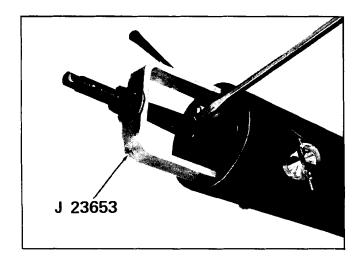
Depressing Lock Plate and Removing Snap Ring
